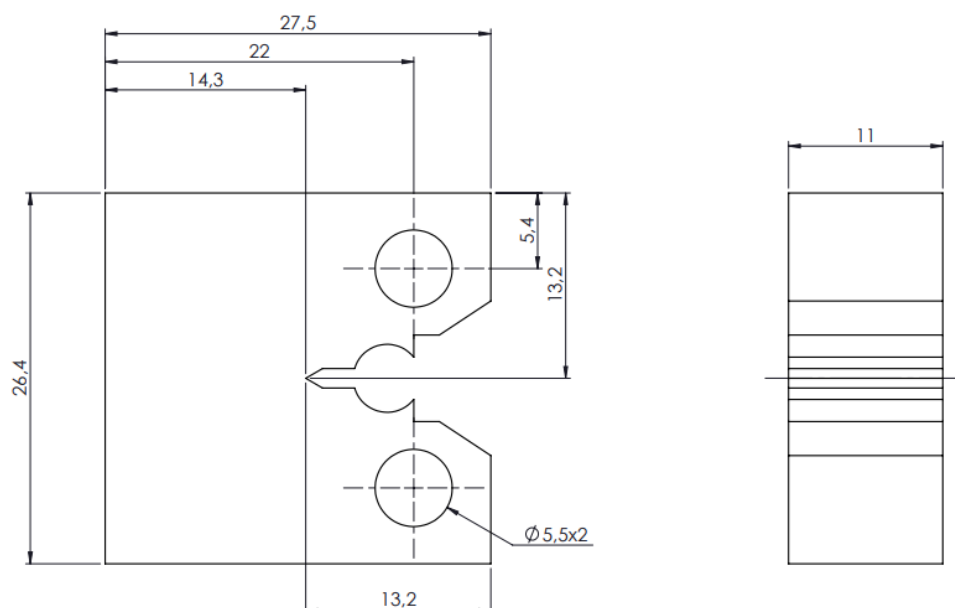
CT specimen with modified dimensions (in millimetres)
